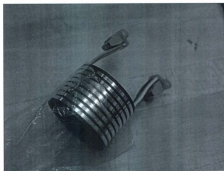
Slip rings with miniature terminal block PC boards in place.
